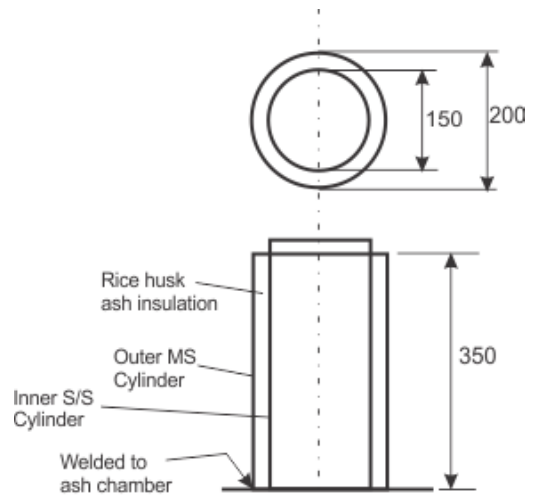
Drawing of the reactor (Dimensions in mm)
